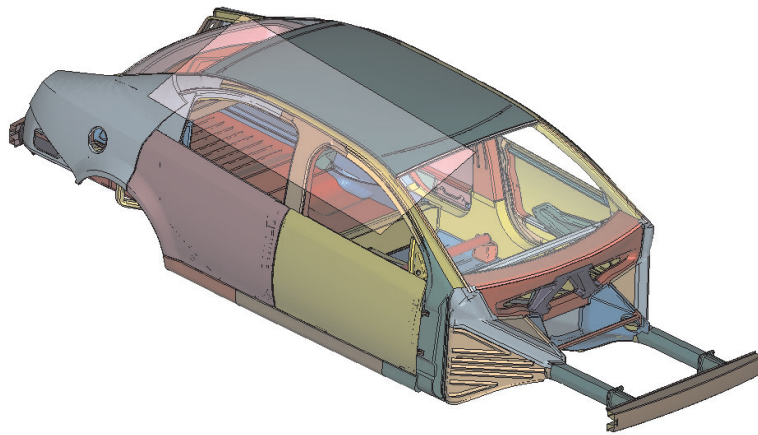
PNGV-Class Roof Crush / Rollover undeformed shape
